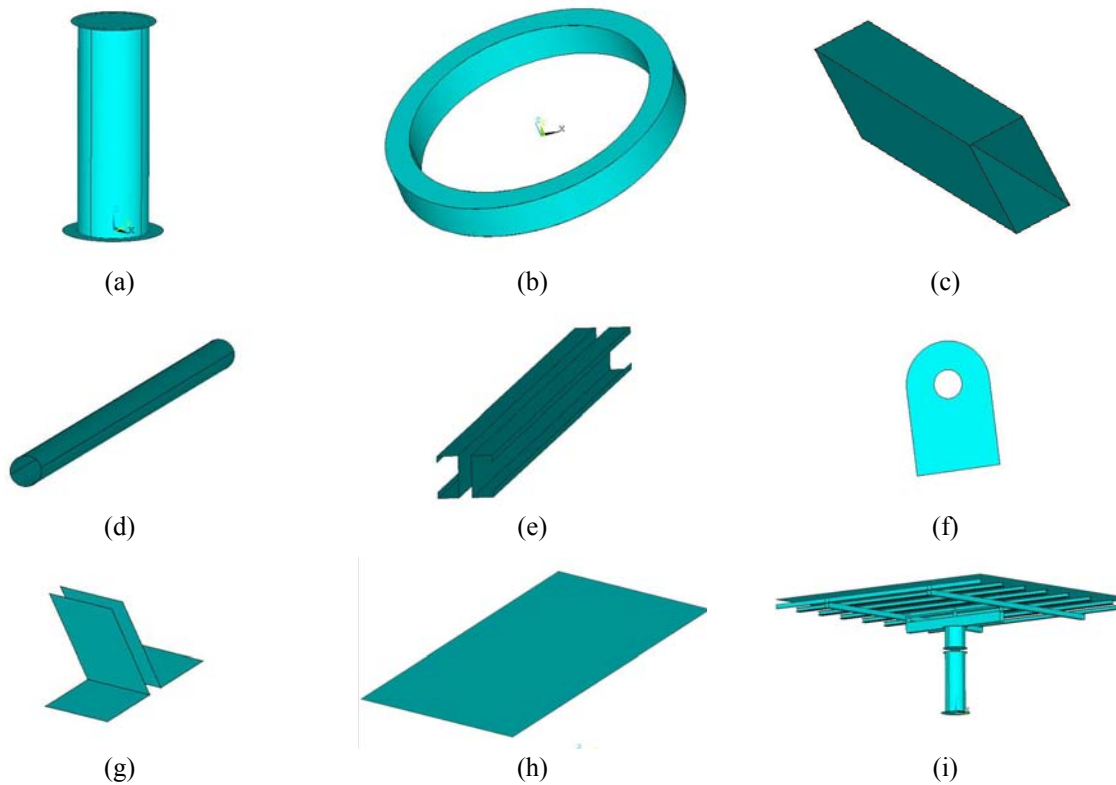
Parts of the solar tracker model: (a) cylindrical base, (b) slew drive, (c) RHS cross beam, (d) CHS driving shaft, (e) pairs of C-channels, (f) driving-shaft supporting plates, (g) pairs for C-channel mounting, (h) photovoltaic panel and (i) assembly.
